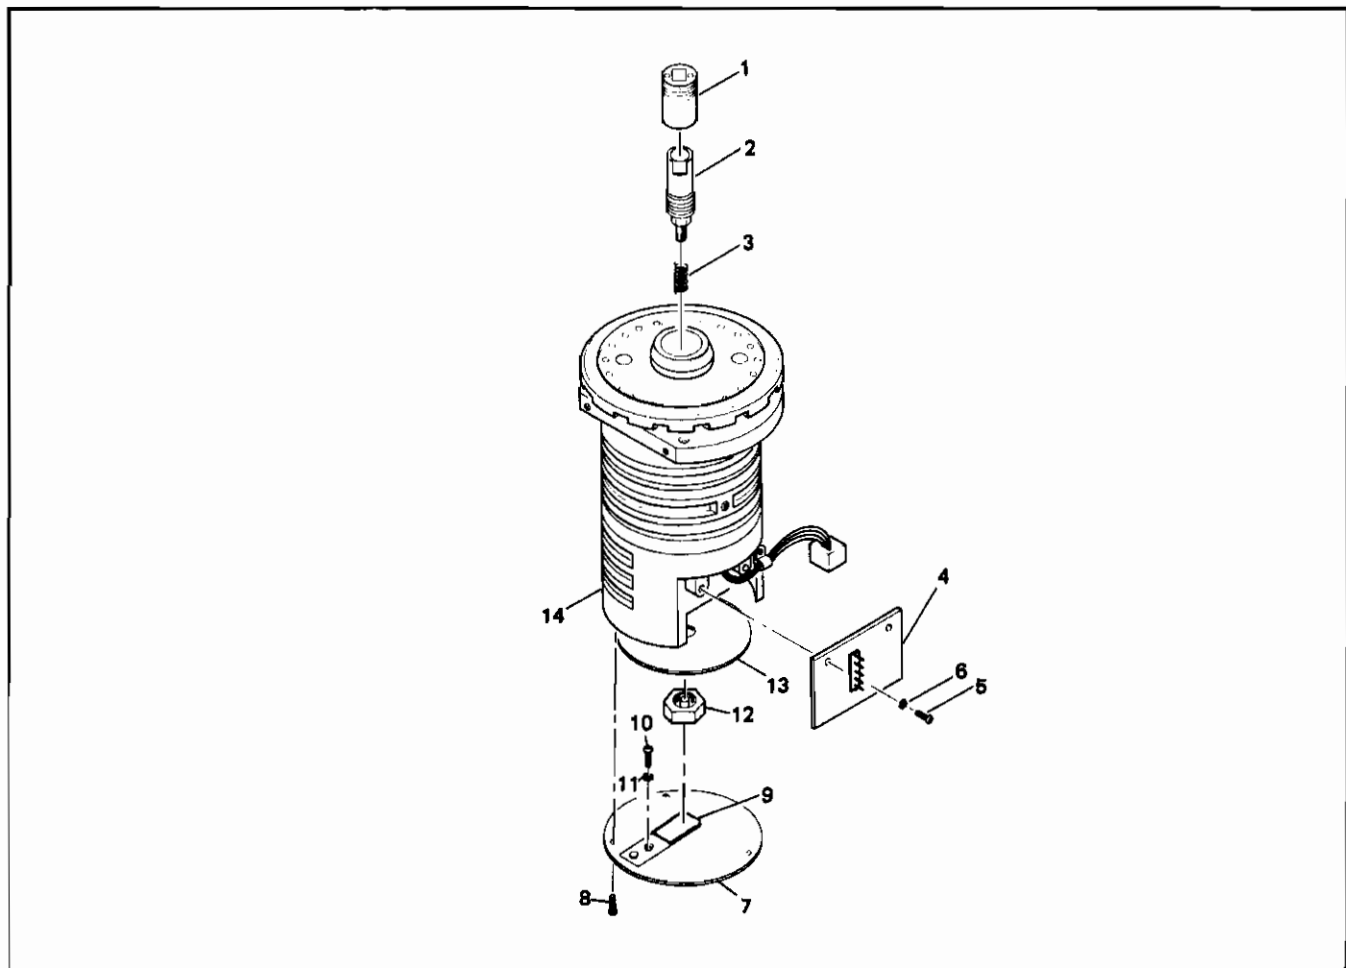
A. Pack Chamber Assembly (Beginning with serial no. prefix 1841), Exploded View
